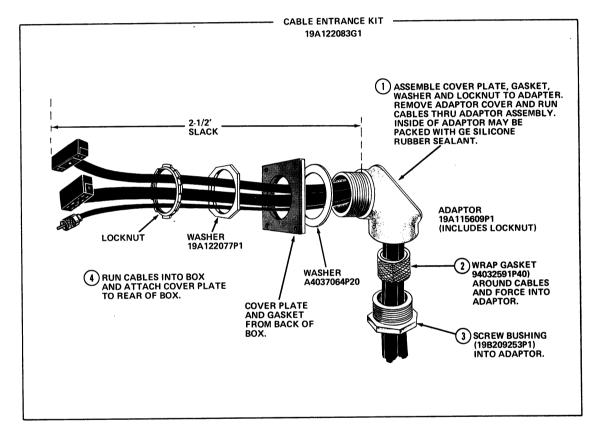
Assembling Cable Entrance Kit 19A122083G1
